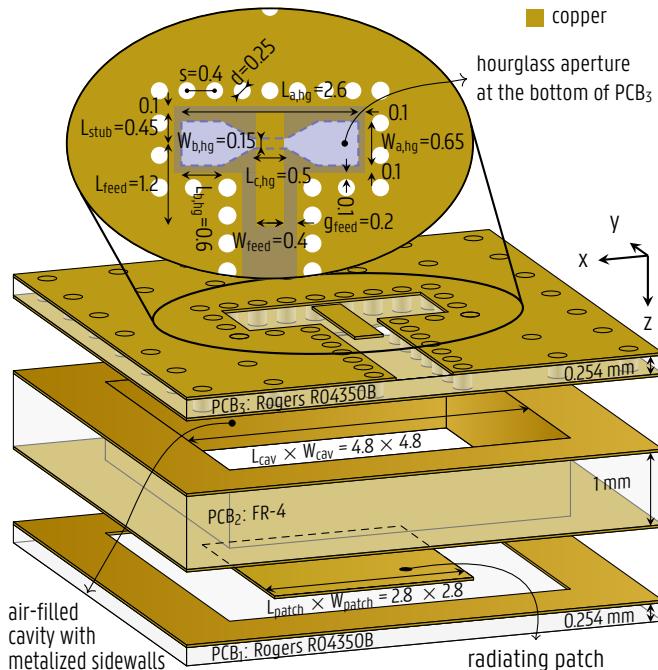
AFSIW antenna with annotated dimensions (in mm). Bottom: exploded view showing the three constituent PCBs, i.e., PCB₁ (RO4350B), PCB₂ (FR4) and PCB₃ (RO4350B); inset: detail of the feedplane.
